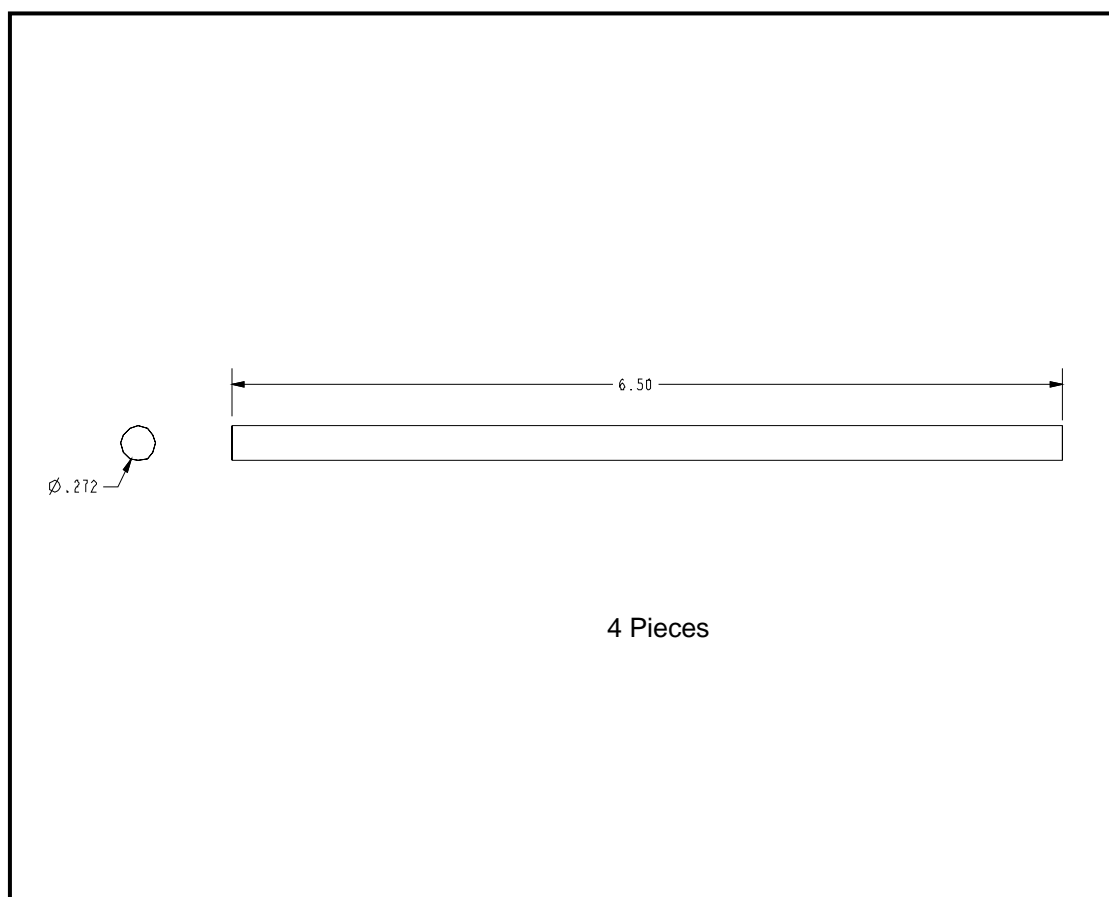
CAD Drawing of the Multi-Sampling Port JSR Mold – Reactor Placement Rods (Material: Stainless Steel, Filename: standardholdrod.drw).
